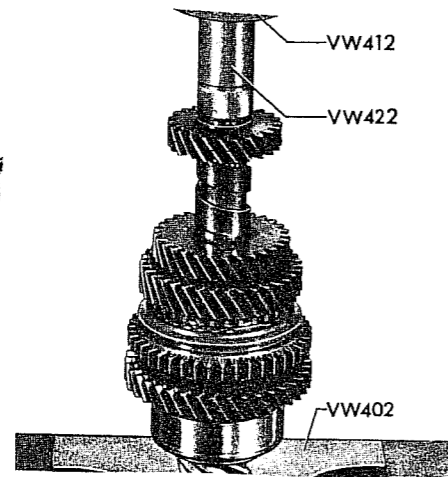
Installing the 4th speed gear wheel on the pinion shaft.
